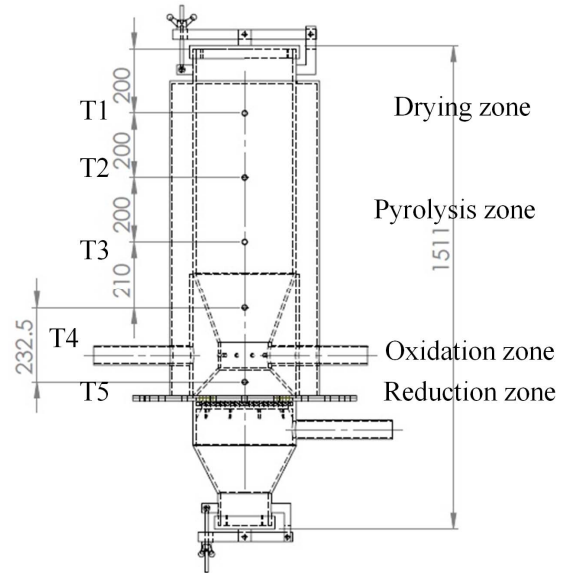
Dimension of downdraft reactor, dimensions are in millimeter.
